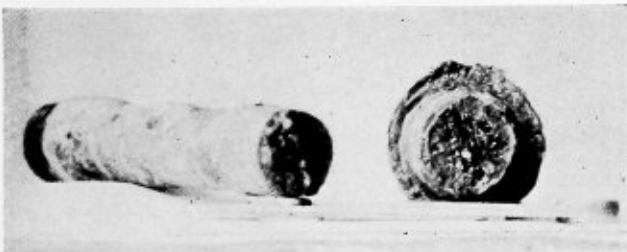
Radial staybolt, outer end of which blew out of wrapper sheet
